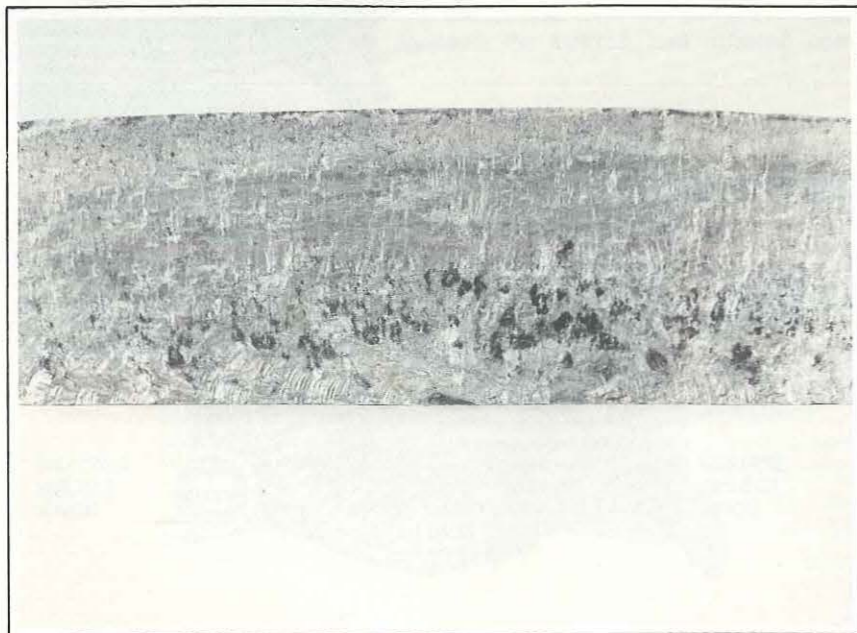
Fracture face of propeller blade showing fatigue and overload zones. The indentation from which the fatigue crack started is indicated.
